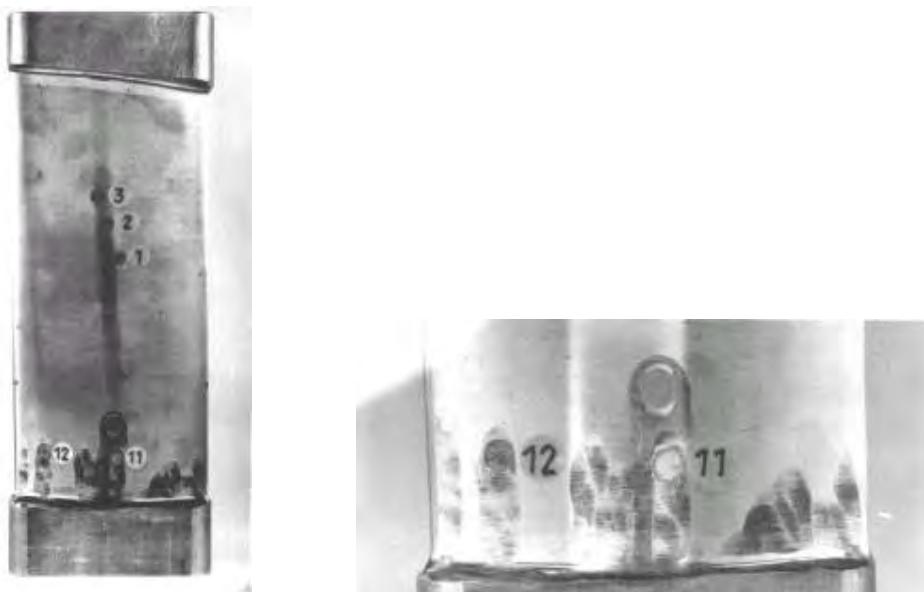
Corrosion damage on stator blade indicating EPR test locations view of entire blade (left) and detailed view of blade base (right)
